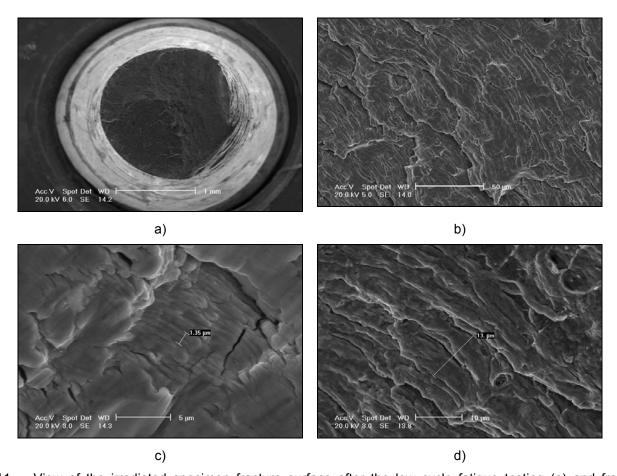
View of the irradiated specimen fracture surface after the low cycle fatigue testing (a) and fracture apperance in a fatigue crack generation region: near the specimen surface (b), in the middle area of the fatigue crack propagation (c) and in the area of defect close (d).
